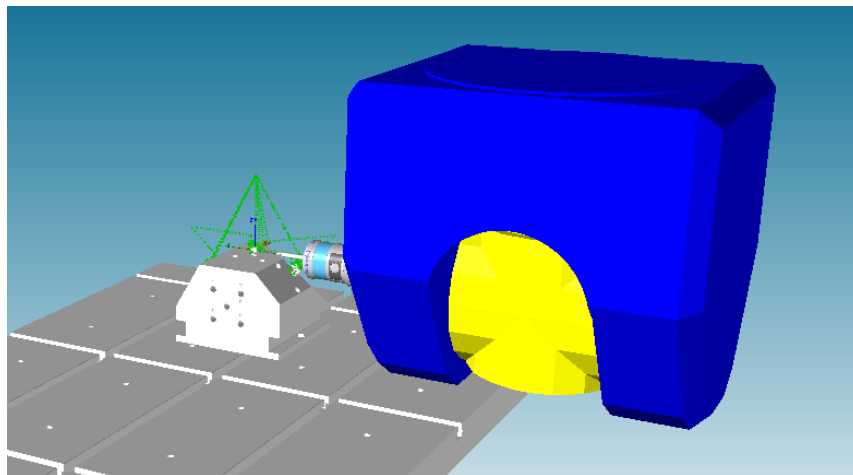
AP90C0 Machine Spindle Measurement Orientation.
